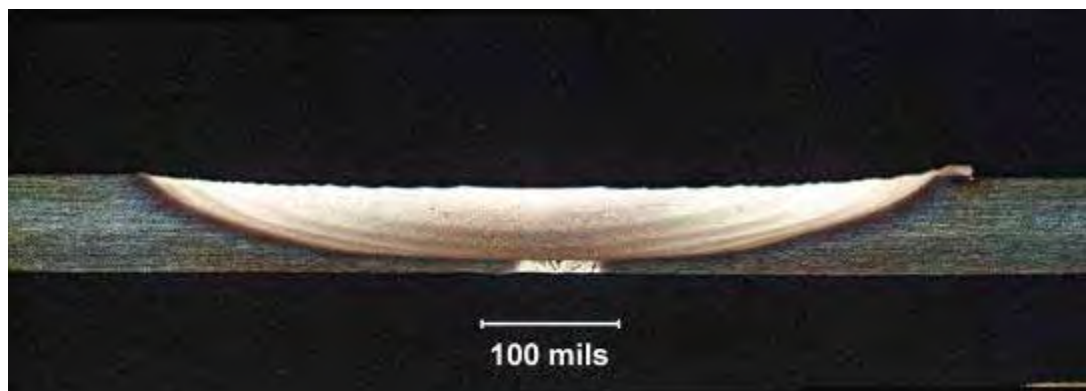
Cross-sectional view of similarly welded material showing lack of weld penetration – courtesy of Paul Edwards, Boeing Co.
